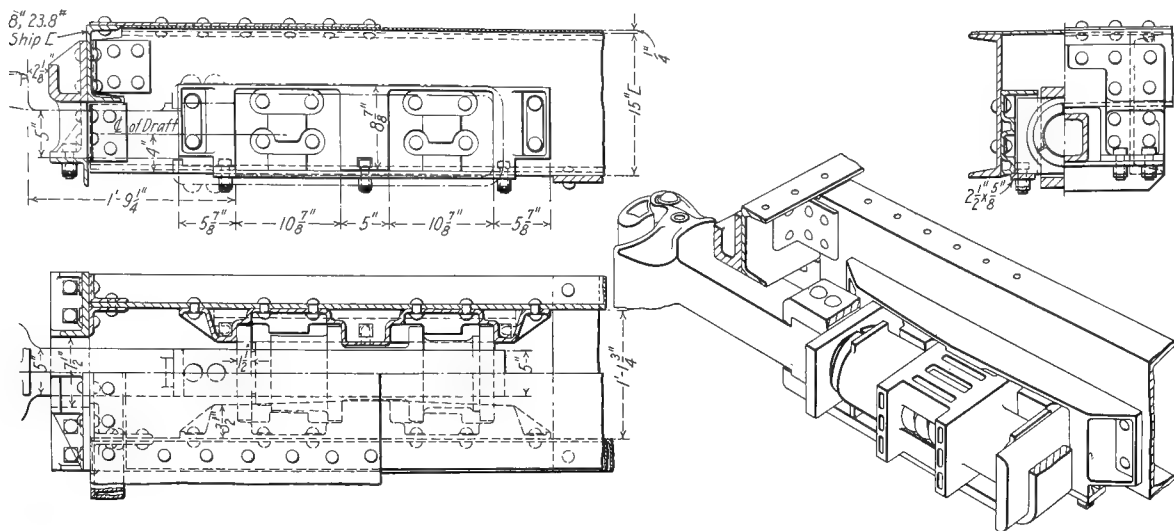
Miner Friction Draft Gear for Atchison, Topeka & Santa Fe Ore Cars.
